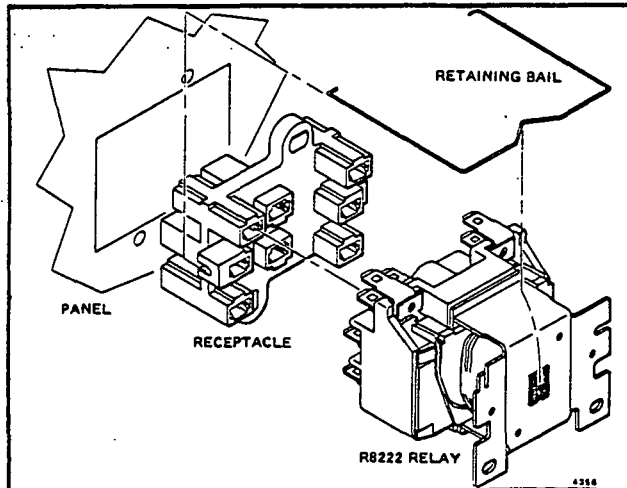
RELAY MOUNTING USING RECEPTACLE AND RETAINING BAIL.
